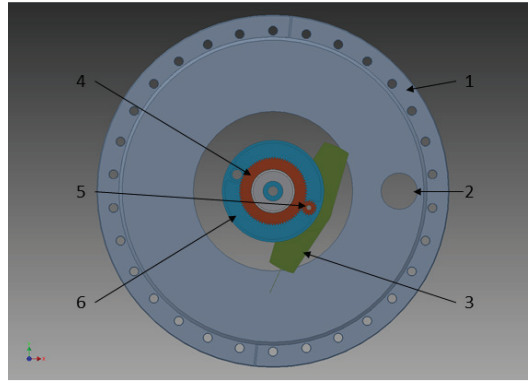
A 3D rendering showing the planetary gear setup. 1: vacuum flange enclosing the system, 2: a cut out for the beam pipe, 3: the carbon wire attached to the blade, 4: the larger stationary gear G_1 , 5: the smaller rotating gear G_2 , 6: the rotating custom-made gear box [31].
